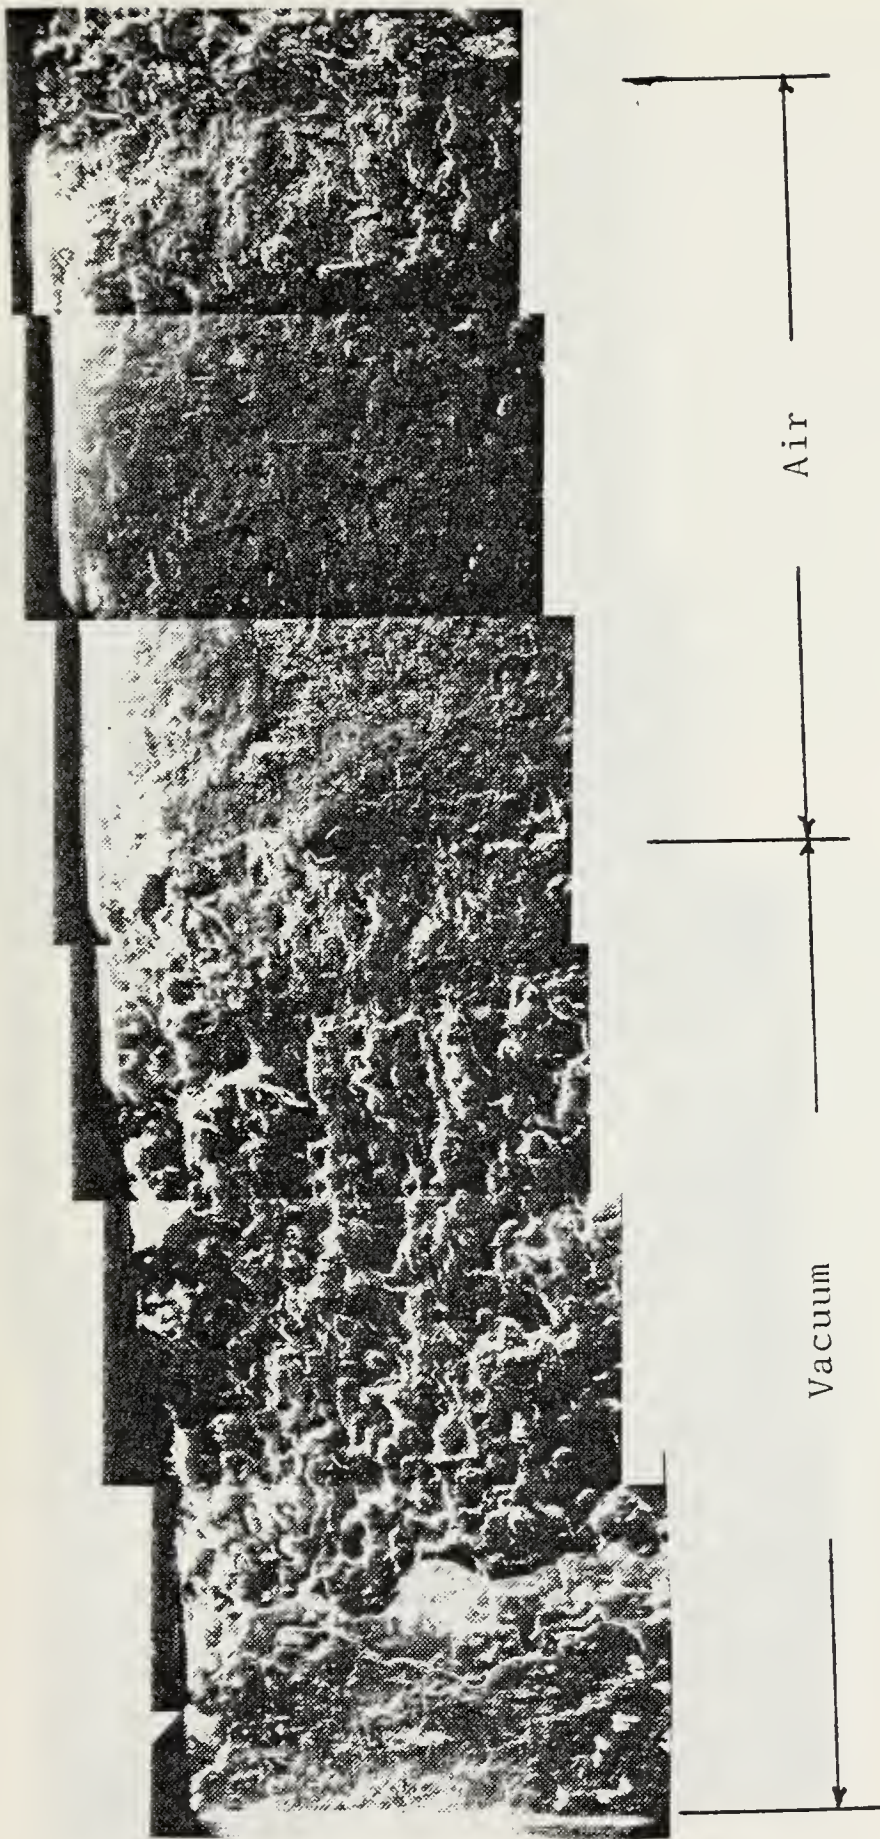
LEFM Fracture Surface of Annealed Material (18x).
